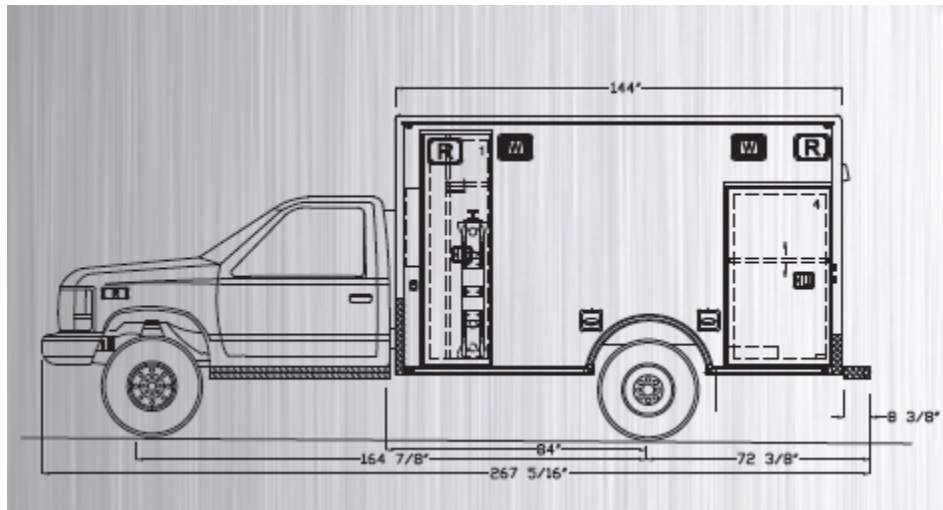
Duramedic Chevrolet UltraLight Exterior Dimensions
